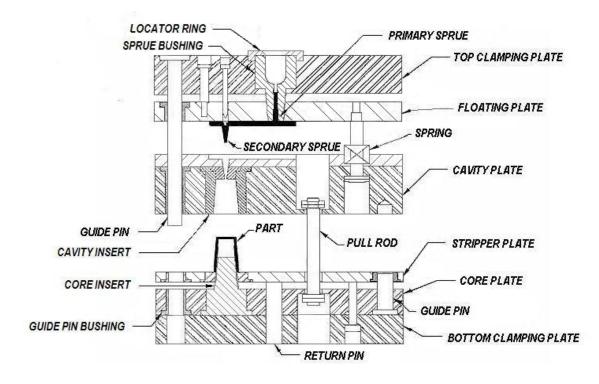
A Three Plate Cold Runner Mold (KenPlas Industry Ltd.)
